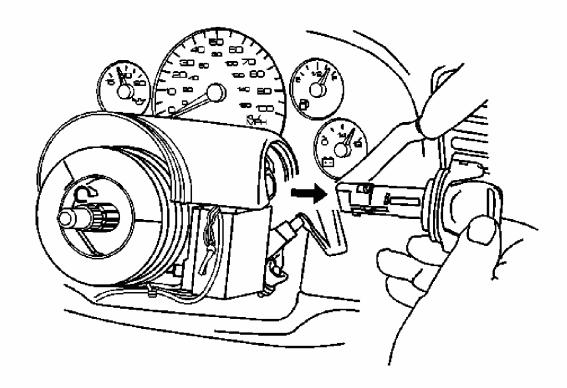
View of Ignition Lock Cylinder, Ignition Lock Cylinder Case Assembly, and Steering Column
